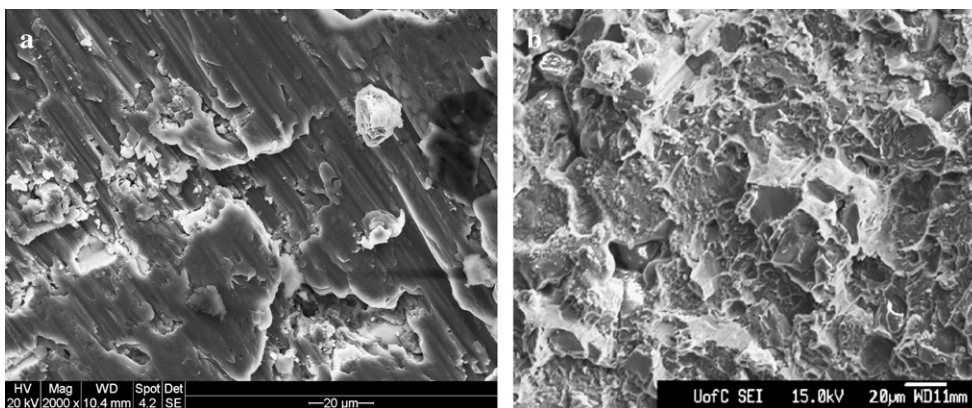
SEM image of the fractured surfaces of joints made using the 5 μm thick coatings at (a) 600 °C and (b) 620 °C.
